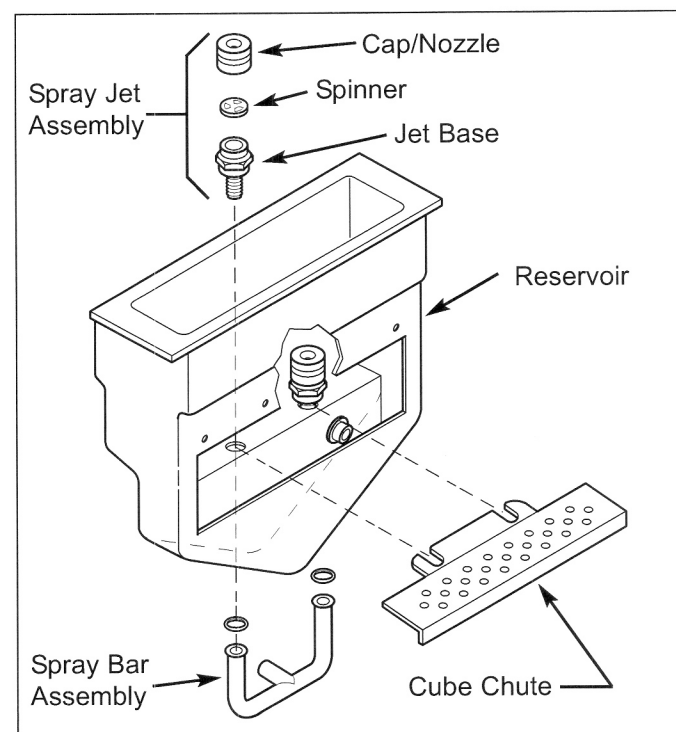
Cube Chute & Spray Jet Assy Removal
